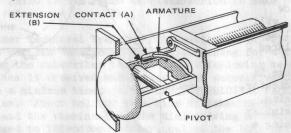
EYEBALL AND ARMATURE ASSEMBLY OPERATED.
